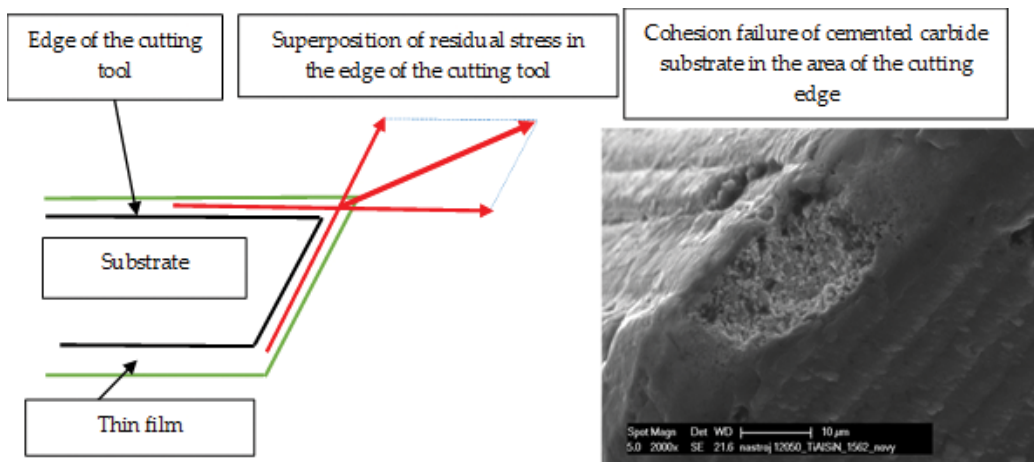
Cohesion failure of cemented carbide cutting edge caused by increasing residual stresses upon grinding [11].
